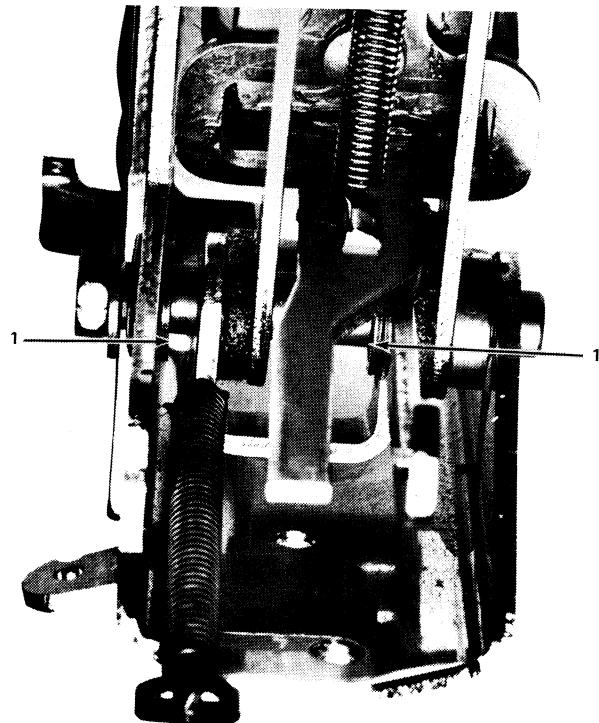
Index Cam Follower Removal (Index Magnet Removed From Printer)
